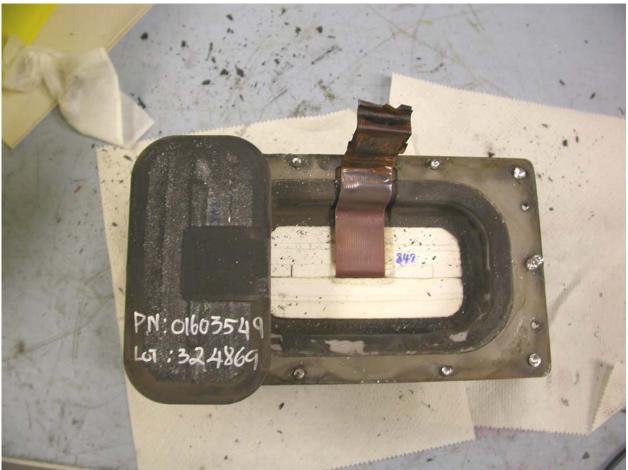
Internal view of the Universal 1603-02-12 (s/n 1629) showing the interior of the crash-protected memory case.
